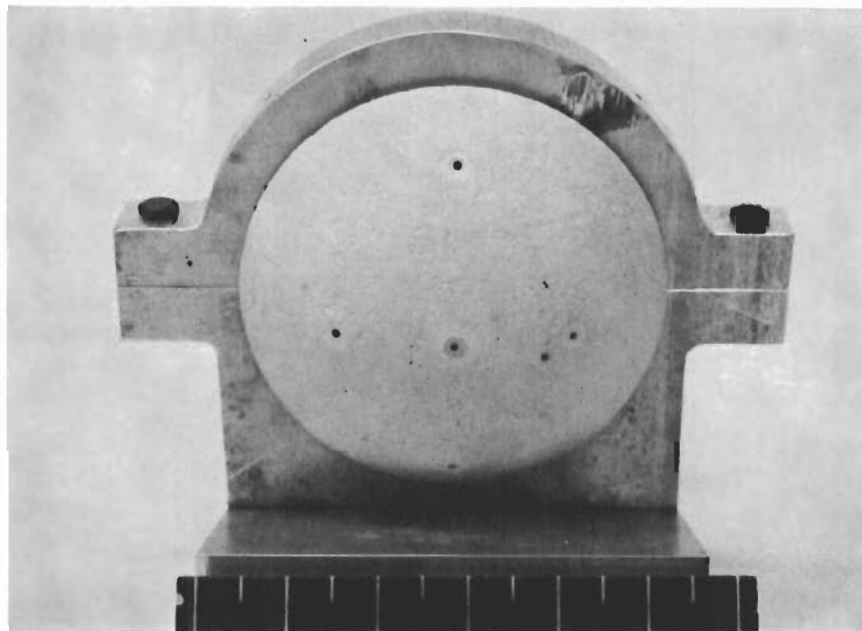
COMPLETED FLIGHT CAP SHOWING ALL INSTRUMENTATION CEMENTED IN PLACE WITH COATING SO-84; Cap Shipped in Tooling Fixture
